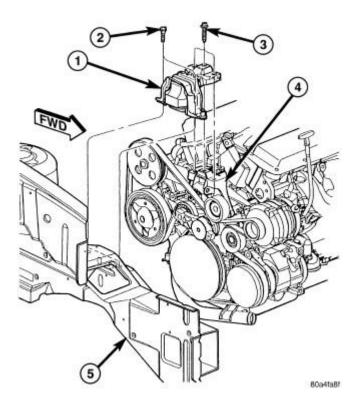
Right Engine Mount Courtesy of CHRYSLER LLC
